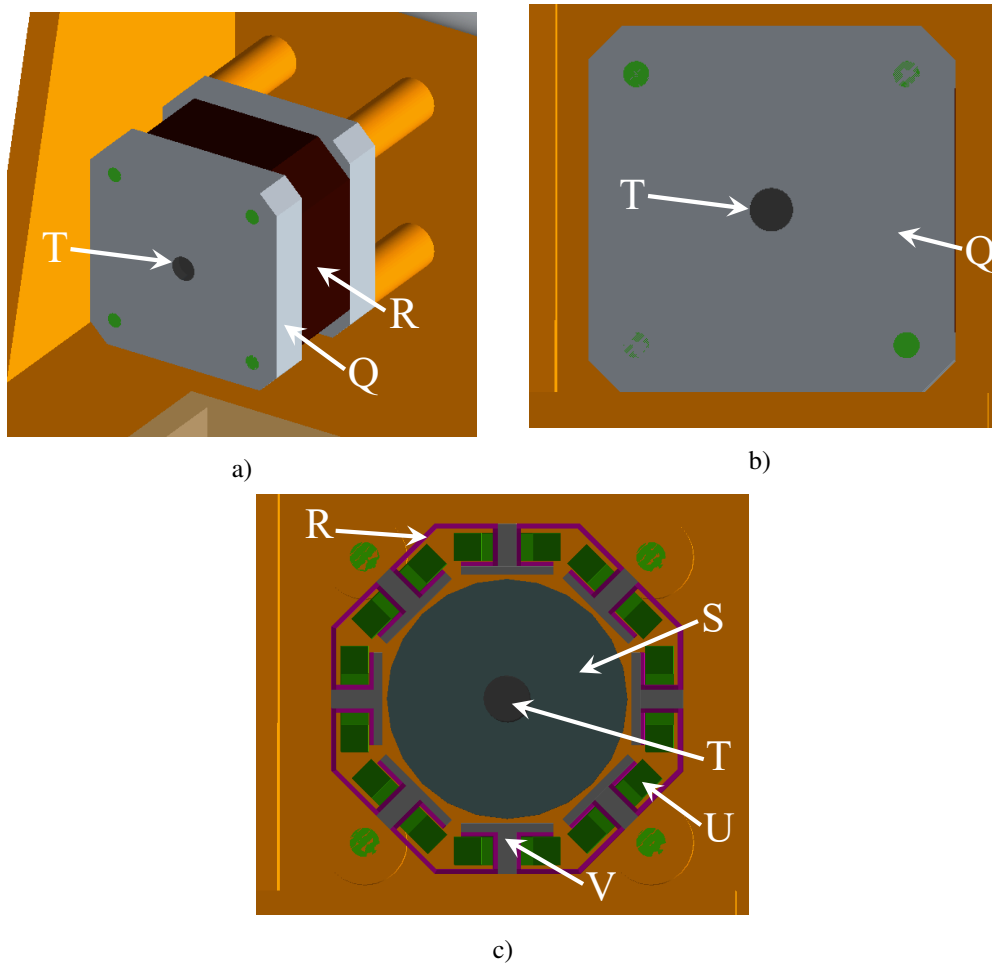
The NEMA17 stepper motor (figures 6.5 and 6.6 labelled ‘A’) modelled in the Geant4 simulation; a) Normal view, b) face on view, c) face on view with exterior casing removed to show internal components.
